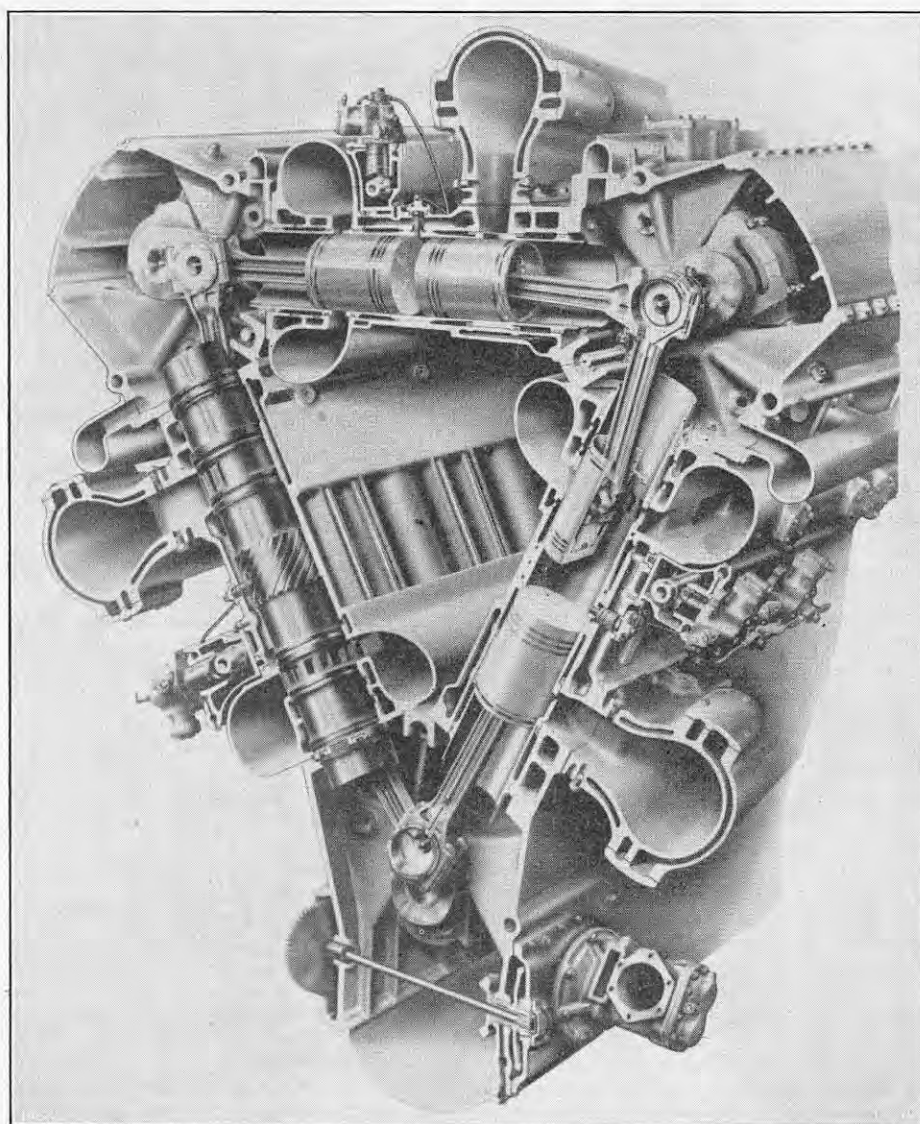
SECTION THROUGH NO. 5 CYLINDER, VIEWED FROM DRIVING END.
